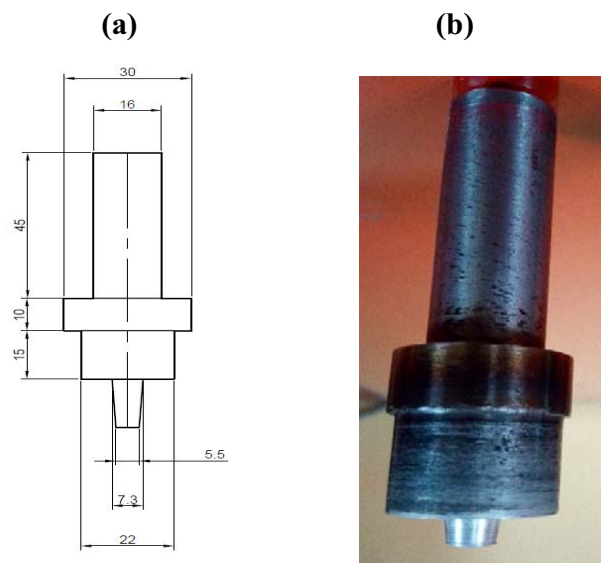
Diagram of cylindrical tapered unthreaded tool (a) Schematic (b) picture
